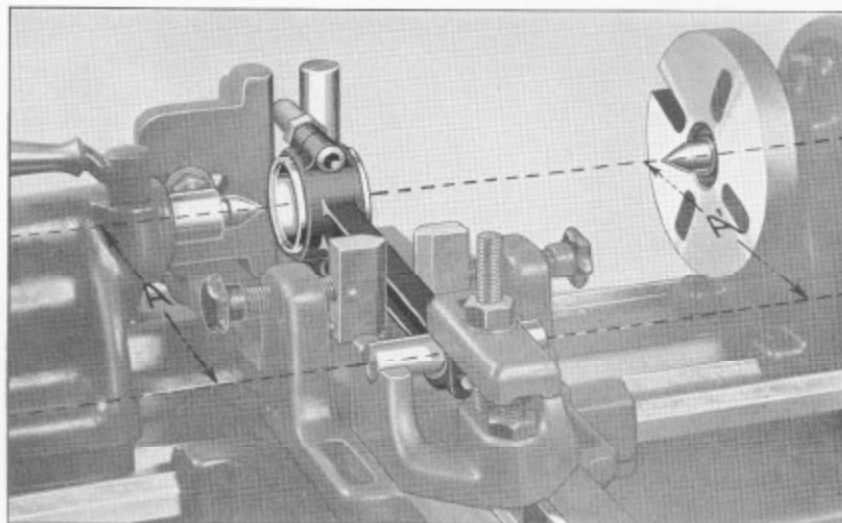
Connecting rod boring attachment mounted on lathe for holding and aligning connecting rod.
